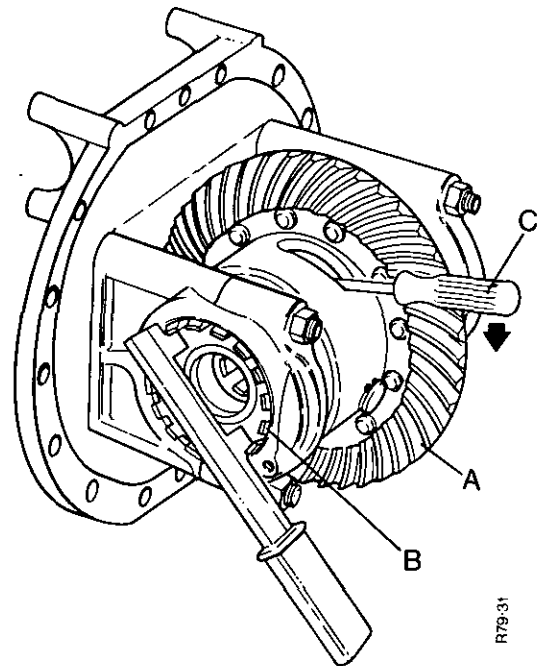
ADJUSTING DIFFERENTIAL BEARINGS
